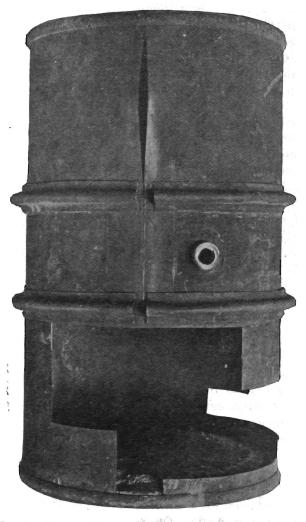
Photograph of drum A showing the failure of the longitudinal weld. The roller bands have been cut to expose the whole of the longitudinal joint.
